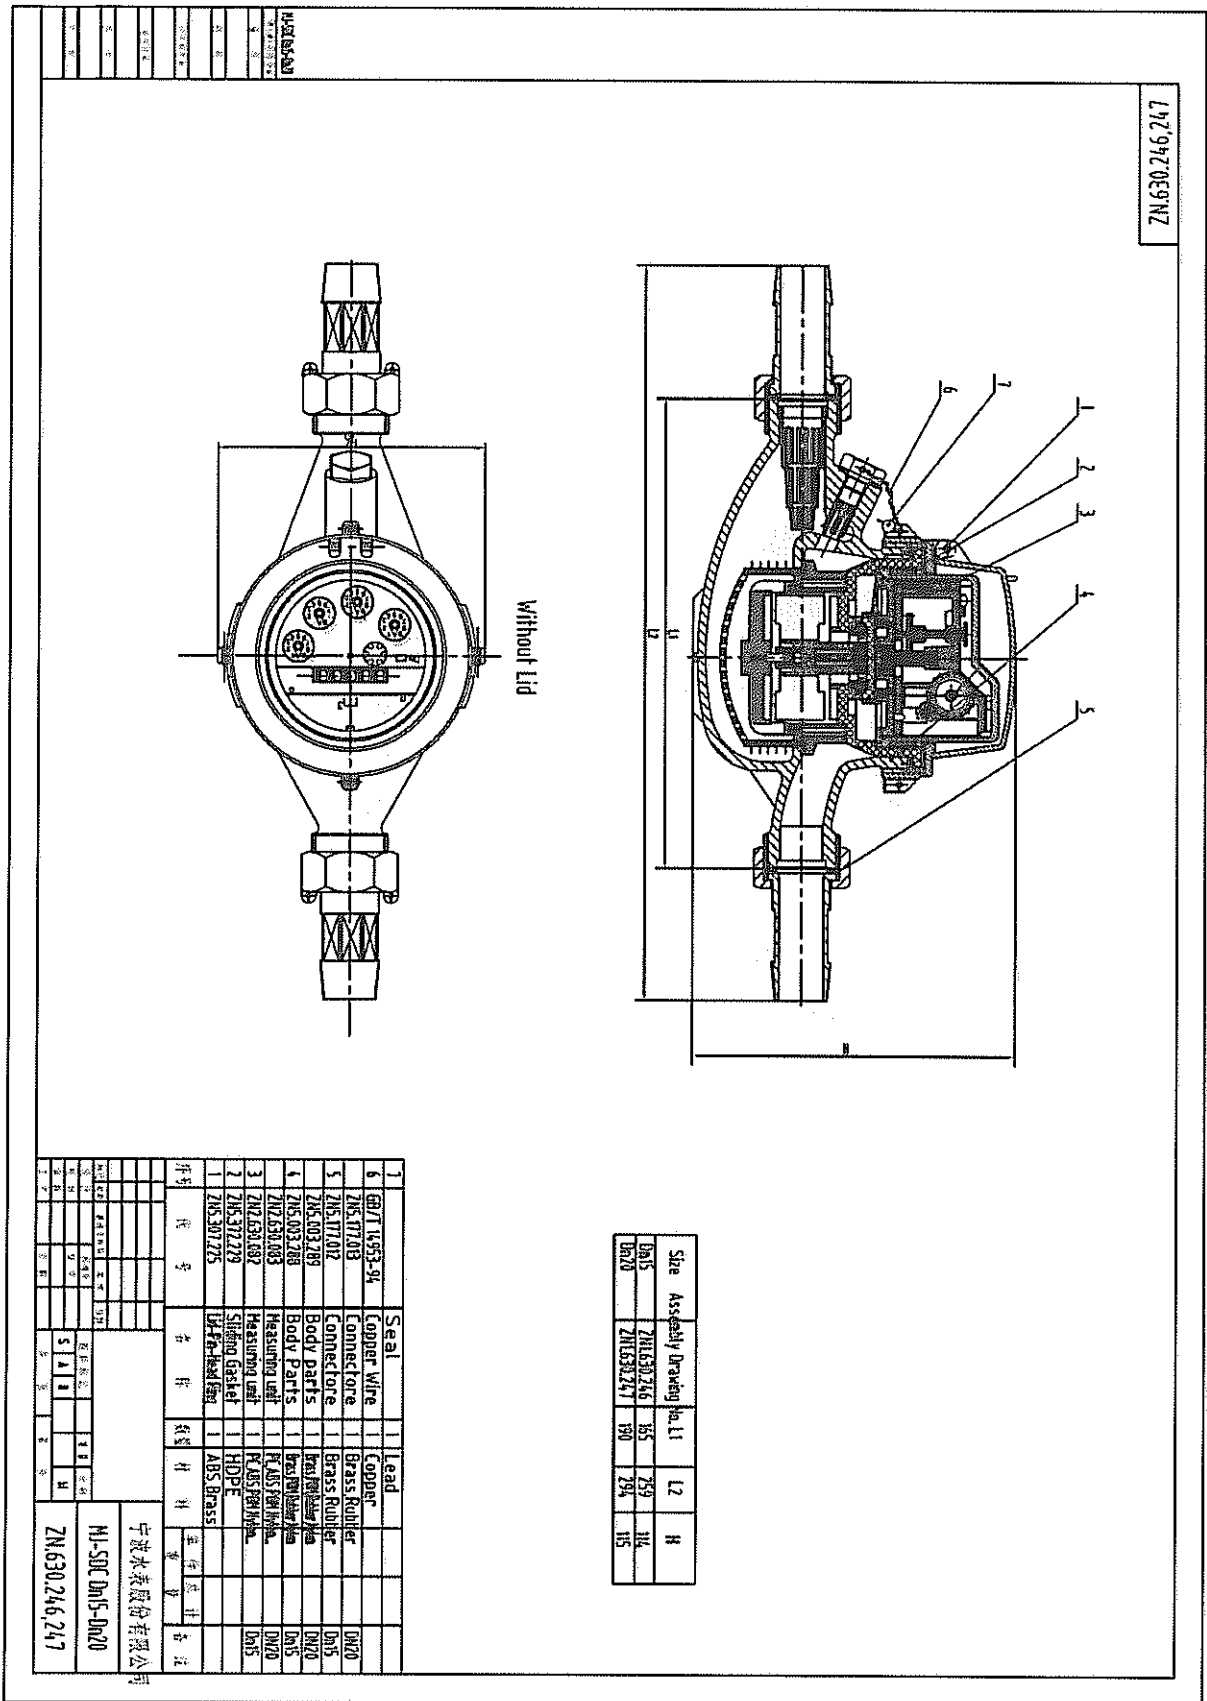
The water meter type MJ-SDC (G) assembly drawings:
